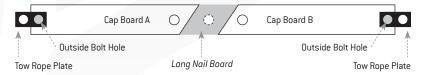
IDENTIFY INSIDE BOLT HOLES
